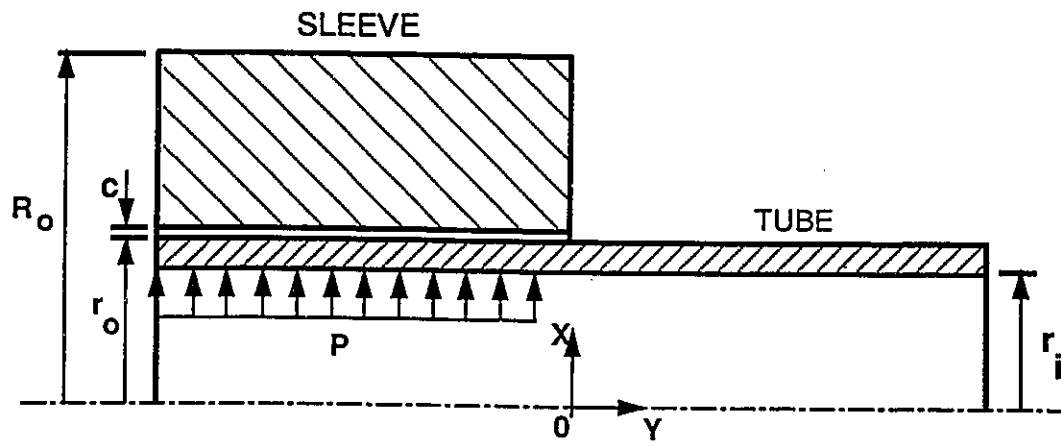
Mathematical Model for Tube-to-tubesheet Joint
